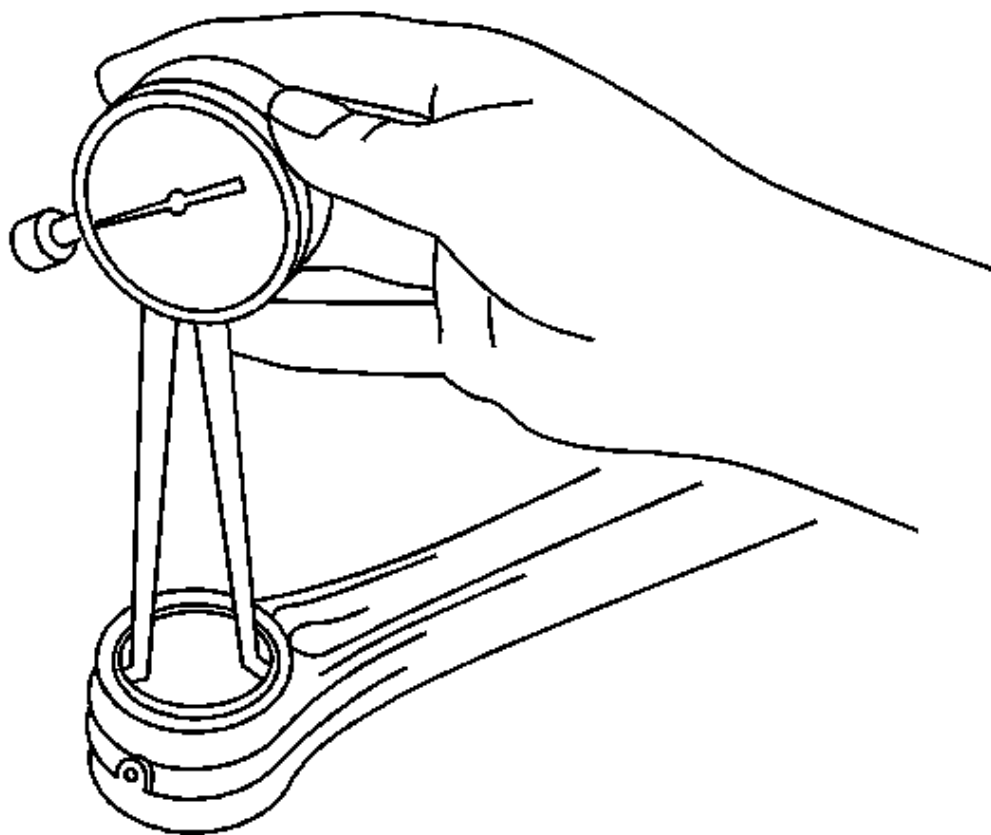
Measuring Connecting Rod Pin Bore Diameter
